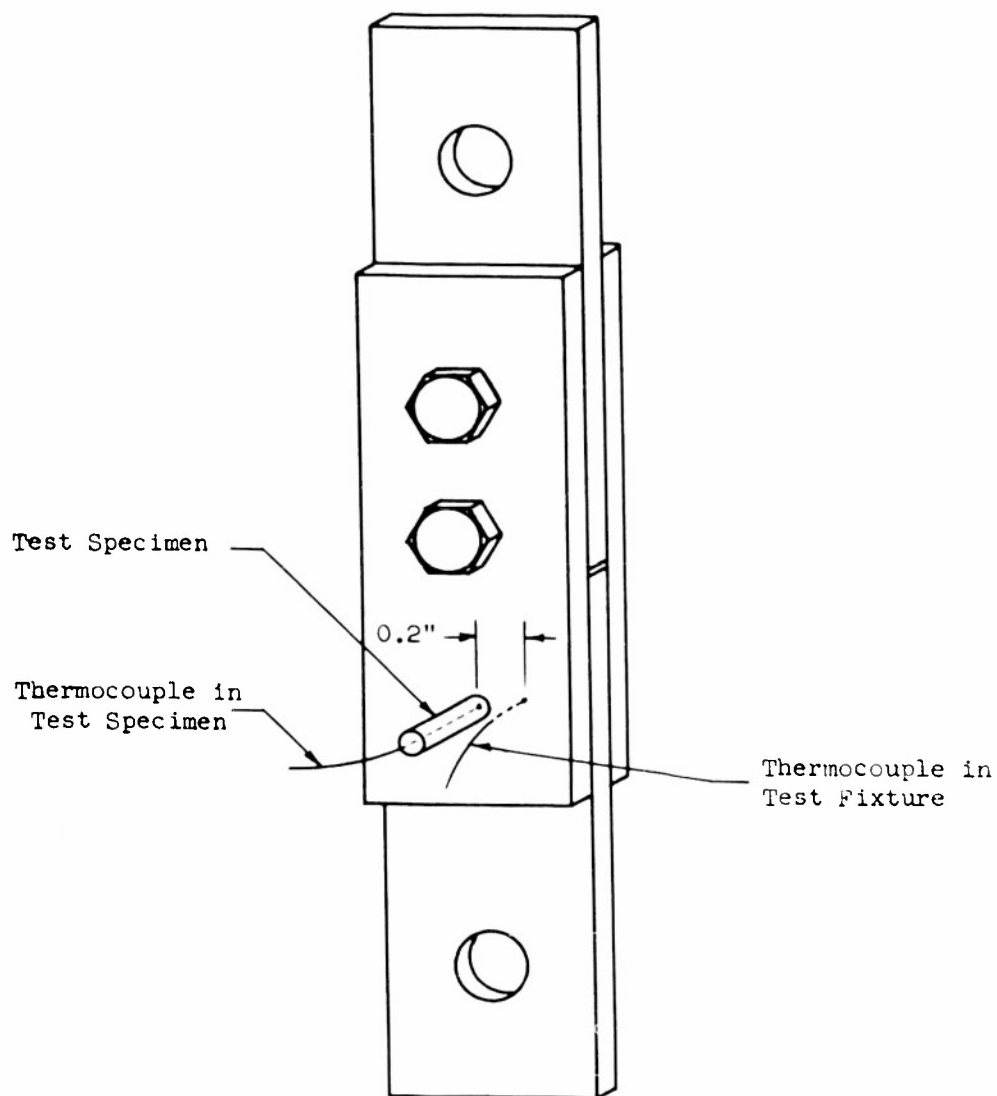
LOCATION OF THERMOCOUPLES IN SHEAR SPECIMEN AND TEST FIXTURE
